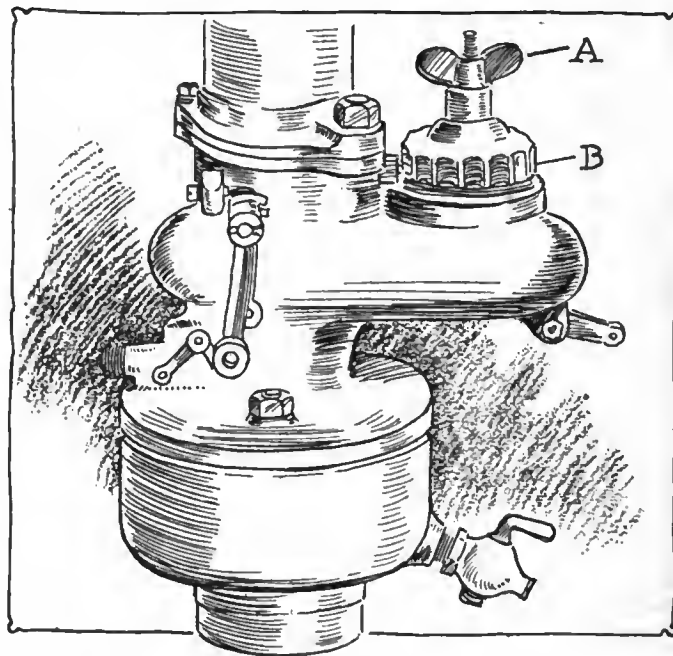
Single adjustment on E. M. F. Carbureter. Wingnut A controls the air supply and mixture
